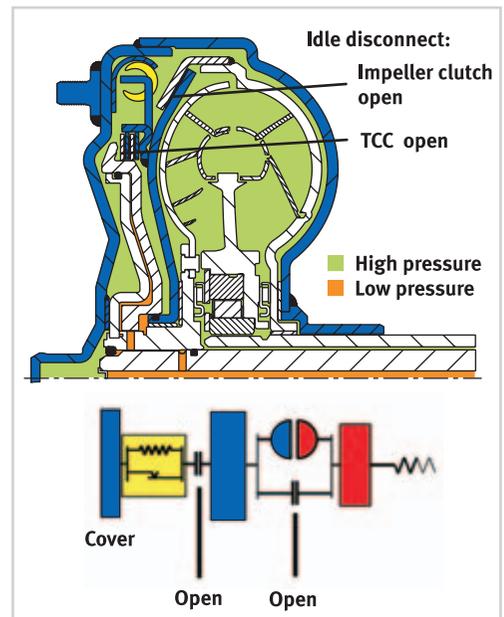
Disengaged impeller and torque converter clutches at idle to save fuel
